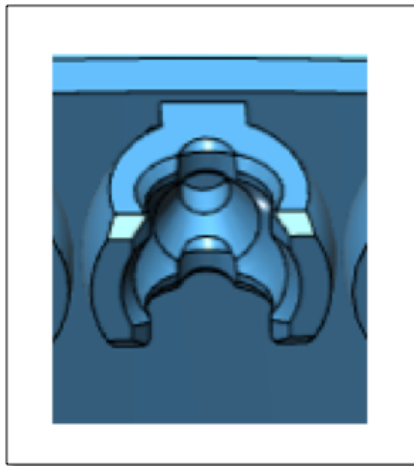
Socket part of the joint. This is used to attach the lamellae to the adhesive disk.
